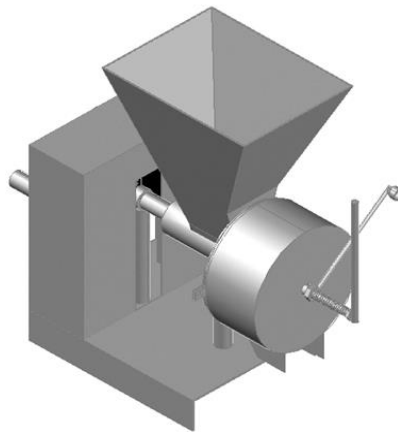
Pictorial View of the Grinding Machine (Isometric)
